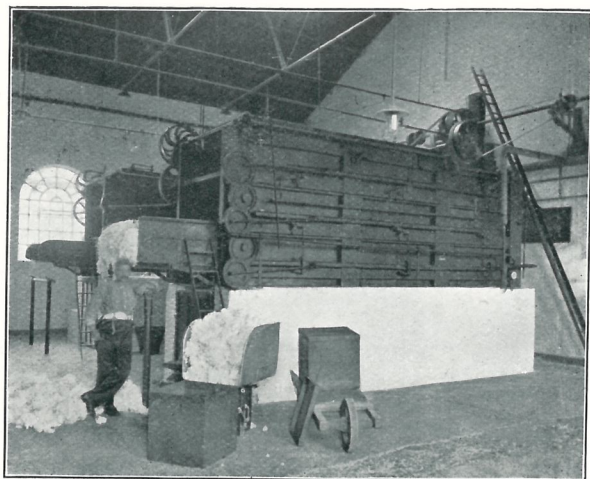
DRYING MACHINE. WALTHAM ABBEY.
